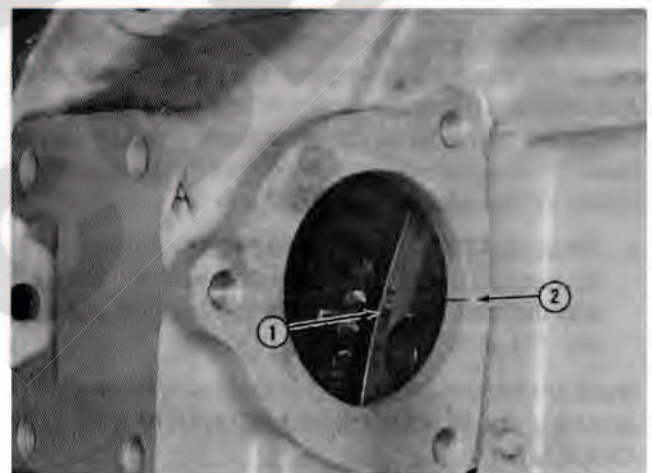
, (K21918). Valve set marks on right bank flywheel and housing — KT/KTA38
